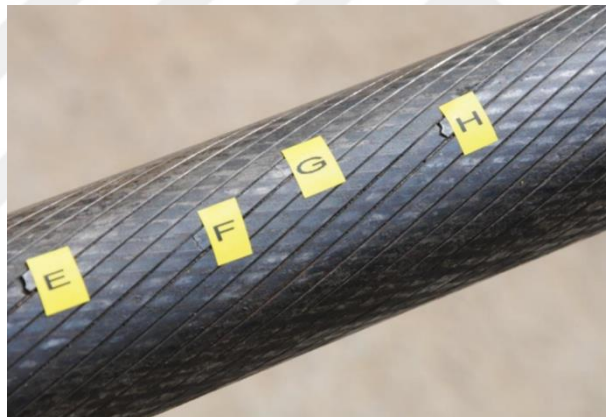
Cracks on the wire rope due to fretting [7]
